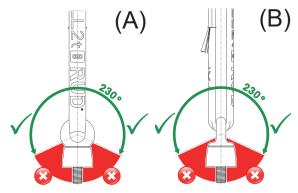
Admissible pivoting area 230° (green): (A) pivoting area in the load ring plane (B) pivoting area transverse to the load ring plane
